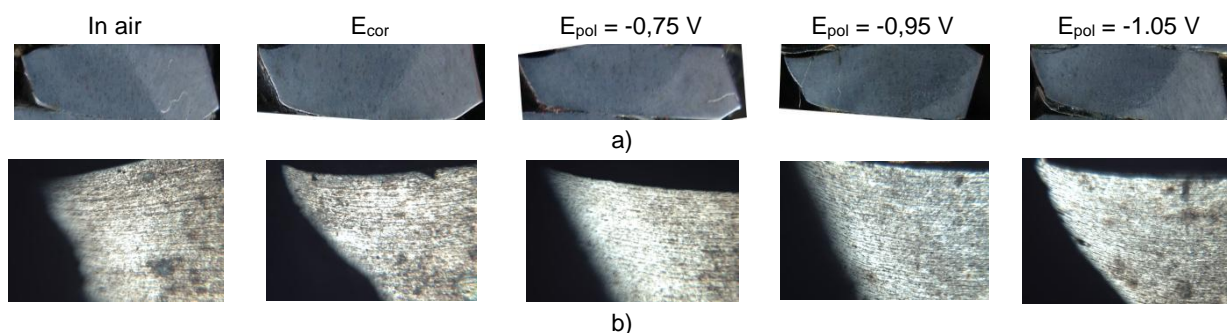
Fragments of the welded joint of X70 steel specimens breaking after corrosion-mechanical tests in air and in NS4 solution under different conditions: a - macrocuts, b - microcuts, $\times 100$
